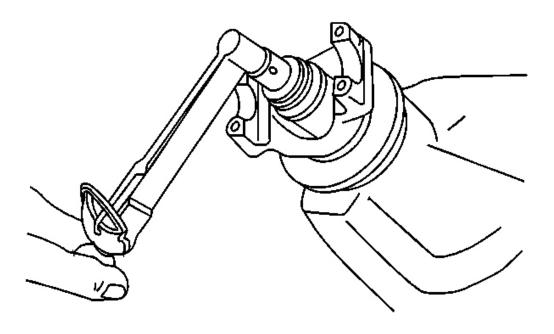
Measuring Pinion Rotating Torque Courtesy of GENERAL MOTORS CORP.
